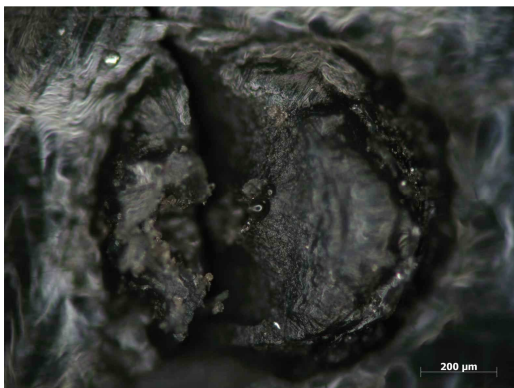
Detail view of Pin 1 moulded with POM on the BA01SLM block (10×)
